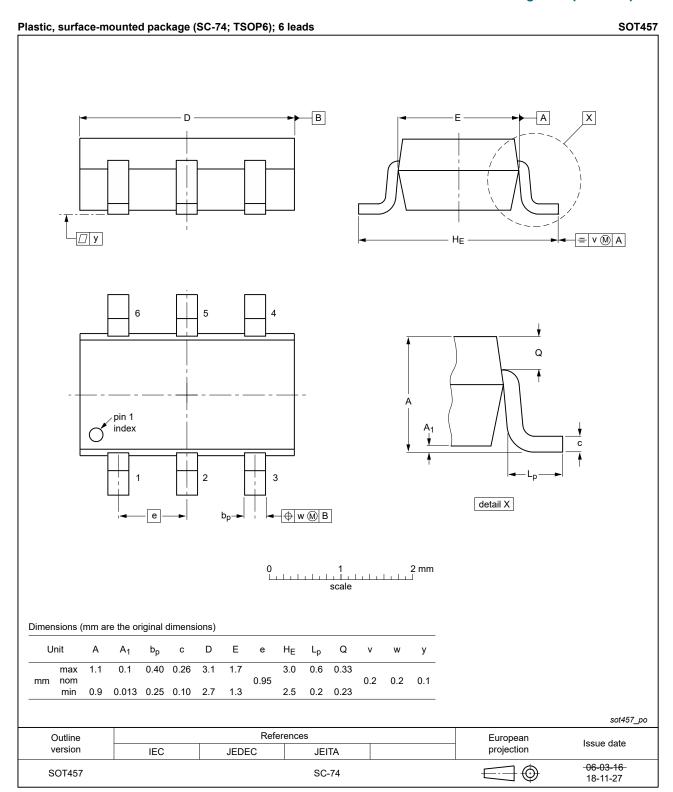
Package outline SOT457 (SC-74; TSOP6)
